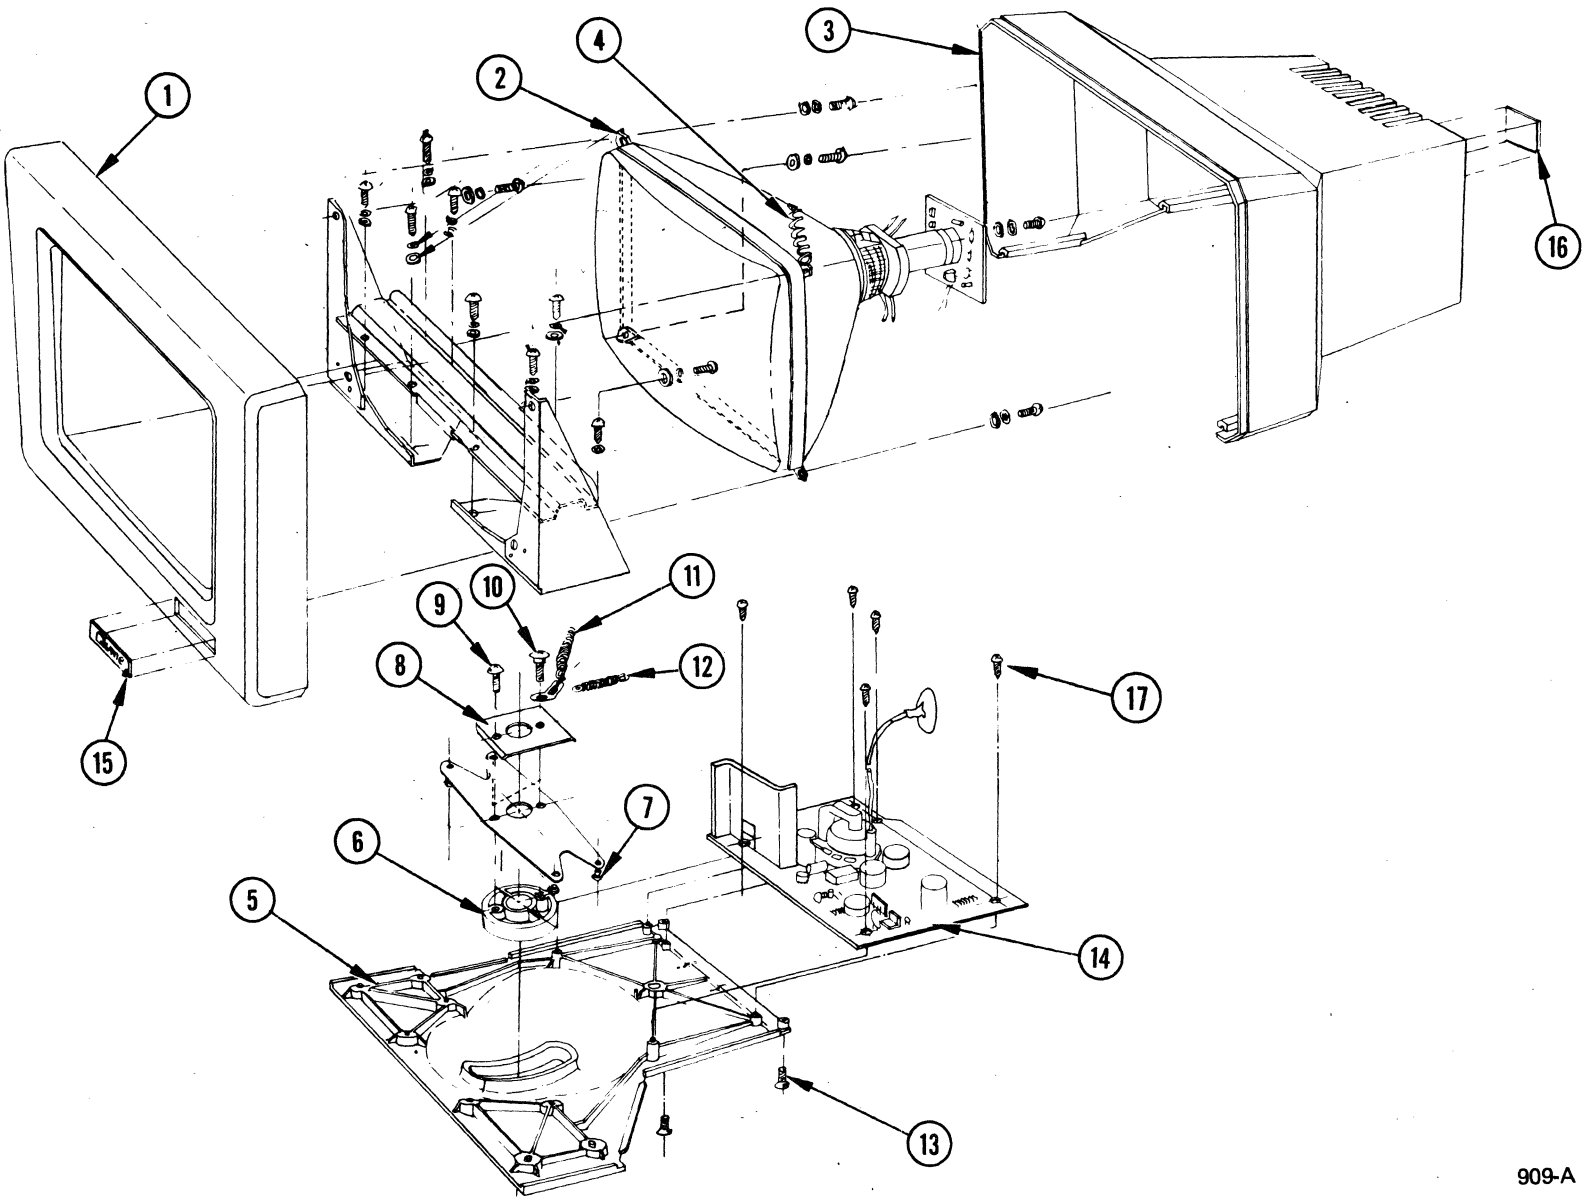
QVT Exploded View Diagram (Upper Monitor Area)
